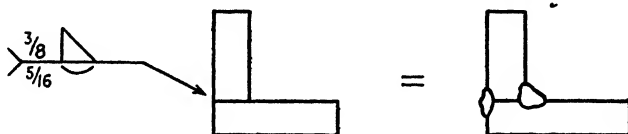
This diagram shows how the form of the weld (its cross-sectional view) may be shown on the blueprint to help the operator visualize the weld.
